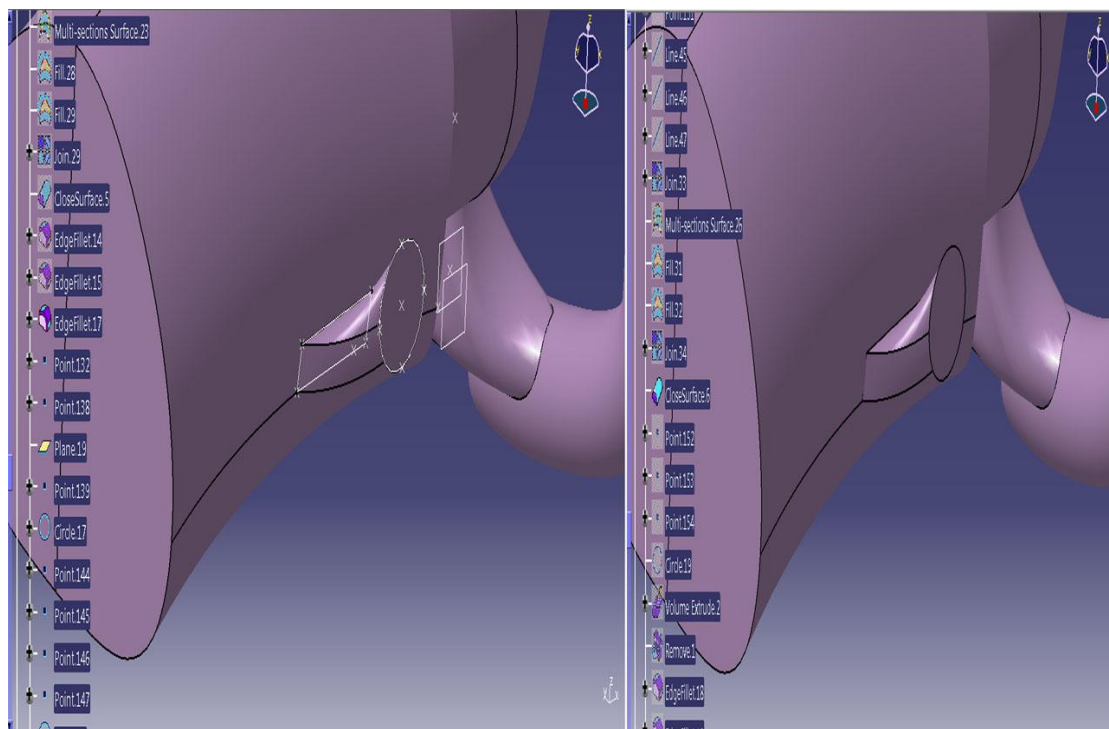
Indicator's lights attachment wireframe second section.
